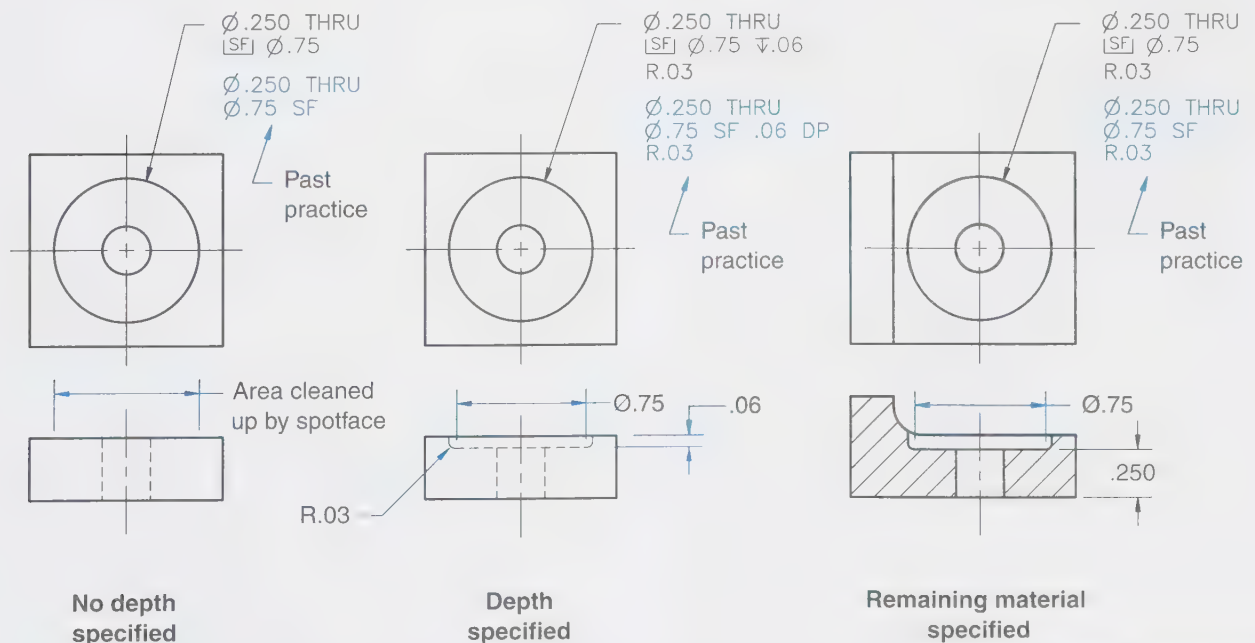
A spotface is used to clean up the surface on the cast part.
